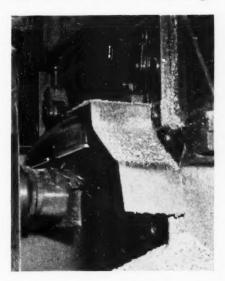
Closeup view from rear of milling operation on agitator pocket.
